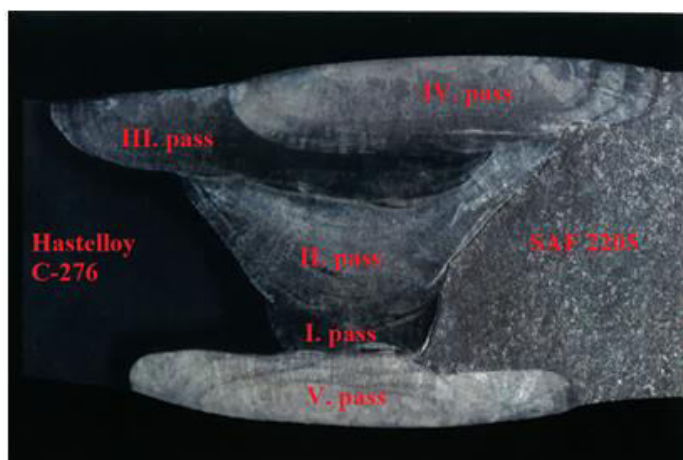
A macro image showing the dissimilar weld joints of SAF 2205 and Hastelloy C-276.
